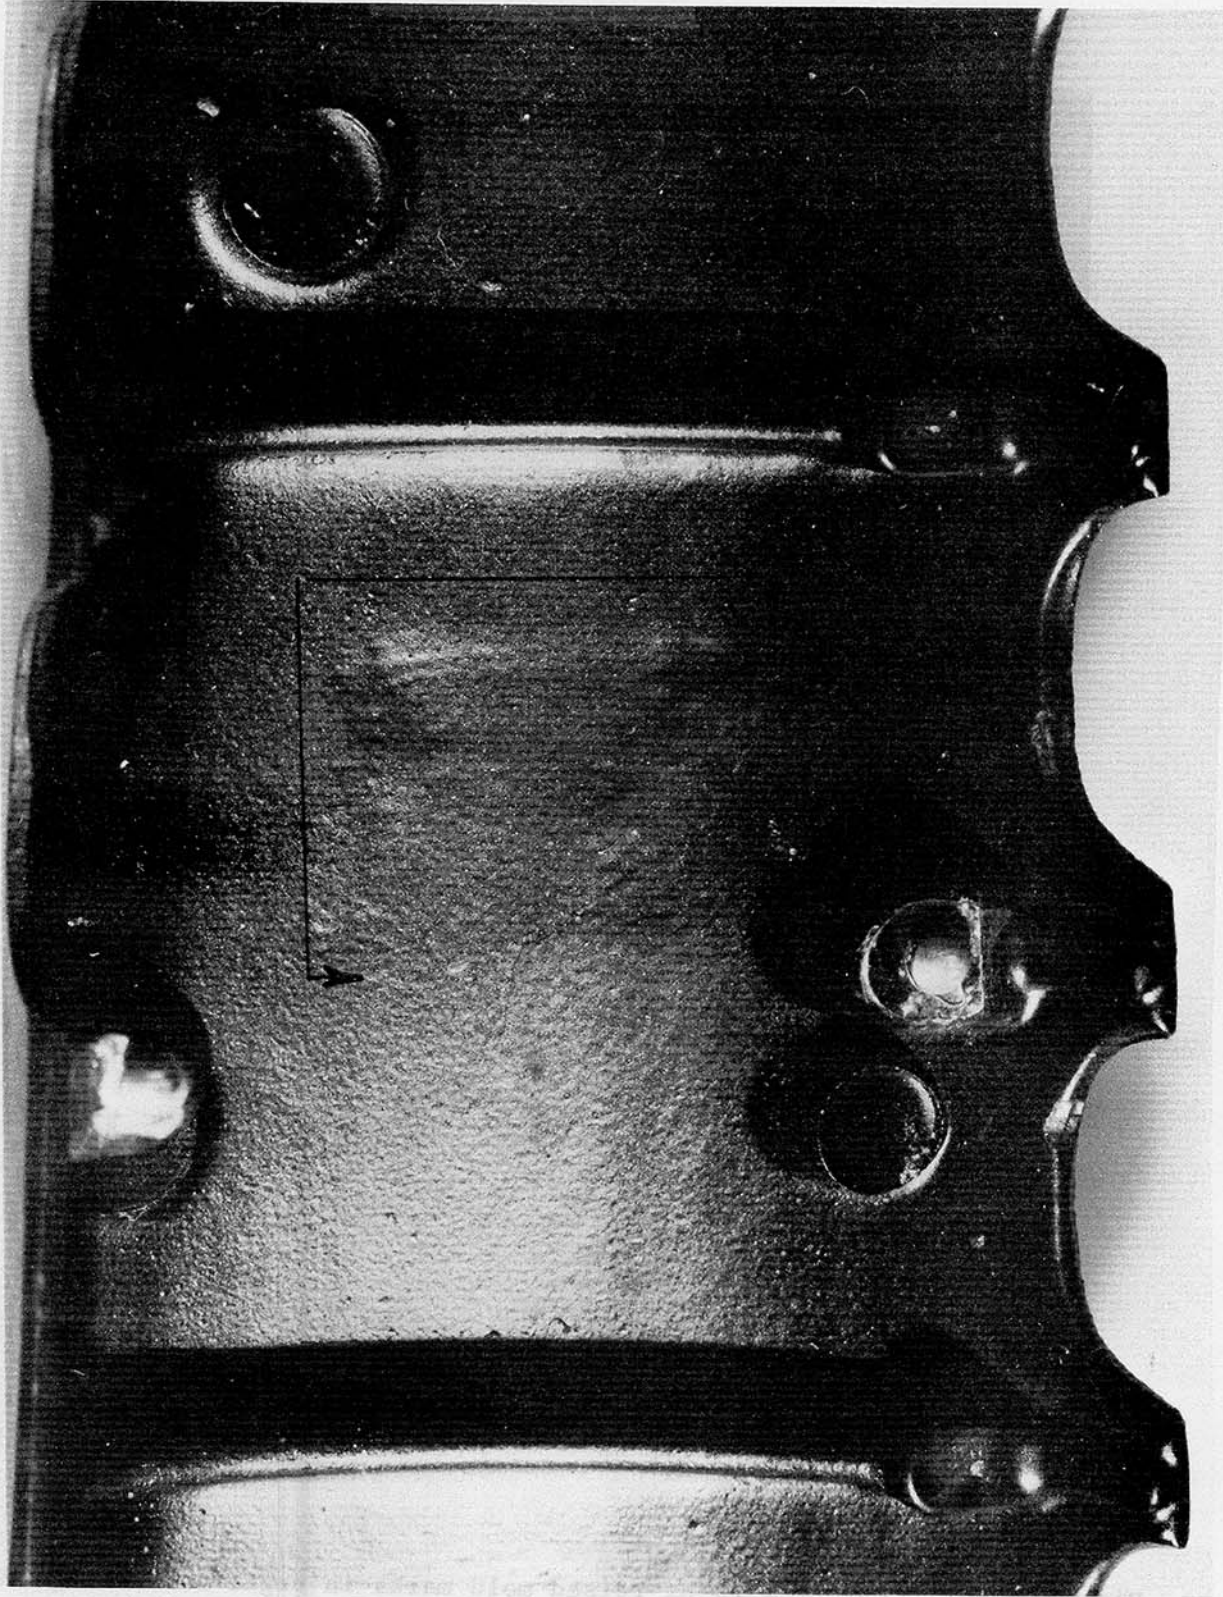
Close-up view of right half handguard of test rifle with aluminum heat shield removed to show apparent die grinding to remove identification marks.
